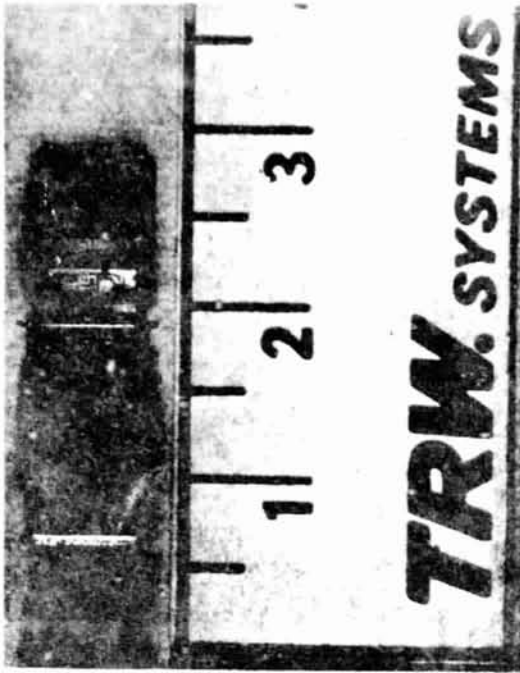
Tantalum Container; One End Welded With Inserted Copper Heat Sink and Top End Cap (Original Magnification; 3X)
